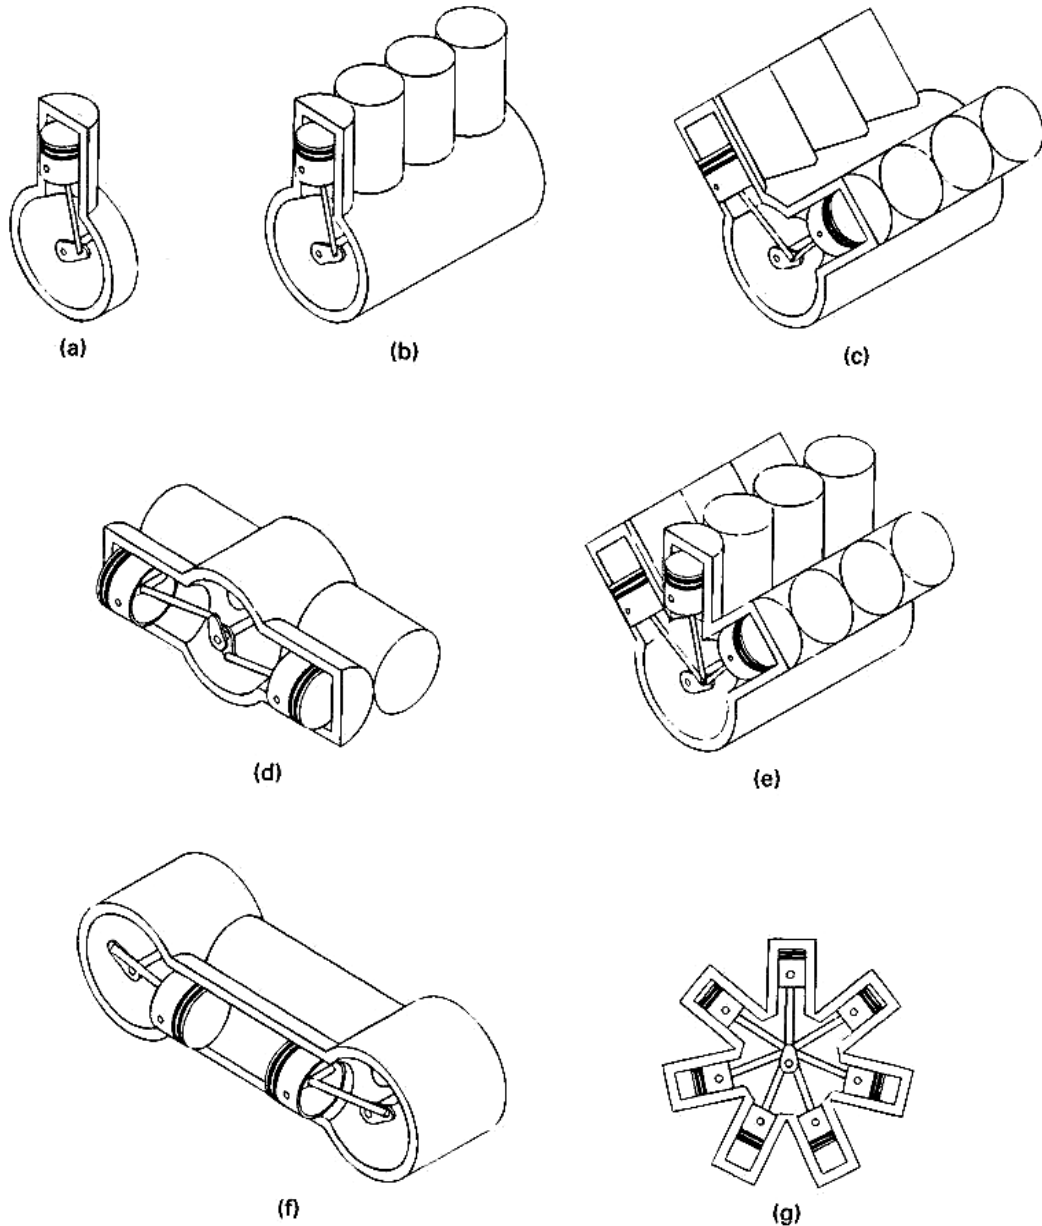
Engine Classification by Cylinder Arrangement. (a) Single cylinder. (b) In-line, or straight. (c) V engine. (d) Opposed cylinder. (e) W engine. (f) Opposed piston. (g) Radial.
